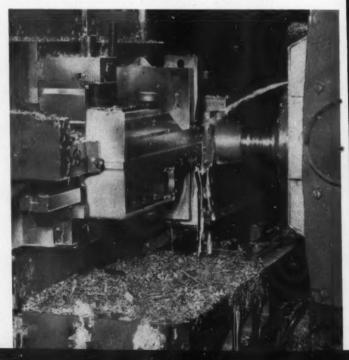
Three moving-gantry type skin mills such as this one are in continuous operation on B-52 components. The machines, equipped with magnetic-tape controls, are used principally for contour milling on lower wing-skin panels.
